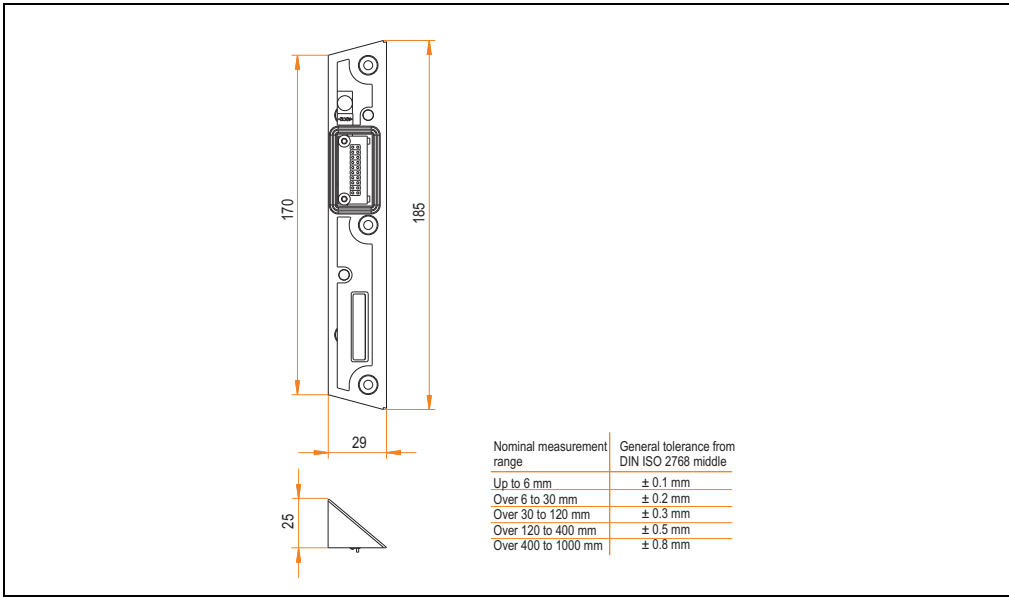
Dimensions - extension cover 5AC800.COV1-00
